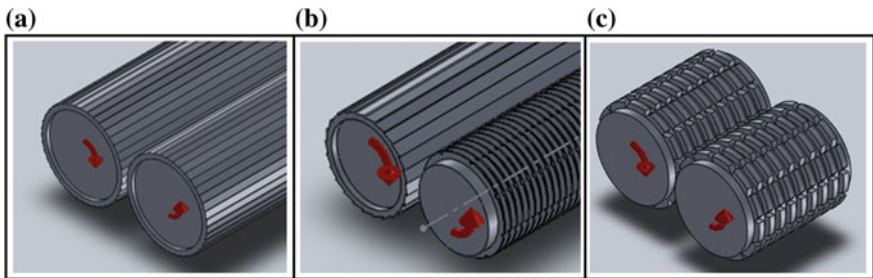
Different design of counter-rotating rollers: a Crushing b Cutting c Milling
